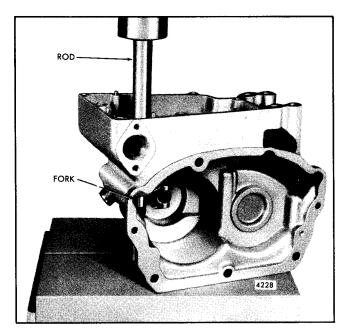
Installing Governor Operating Shaft Fork on Operating Shaft and Bearing Assembly using Tools J 21995-1 and J 21995-2
